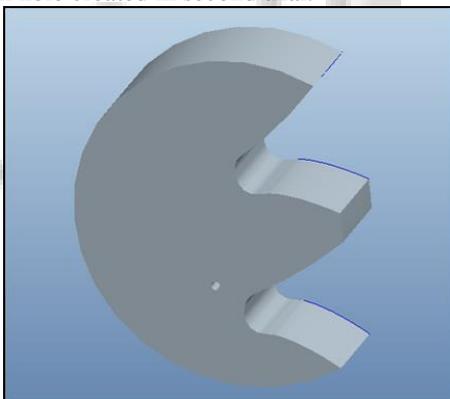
Isometric view of 3-D asymmetric gear with hole in 3rd trial
